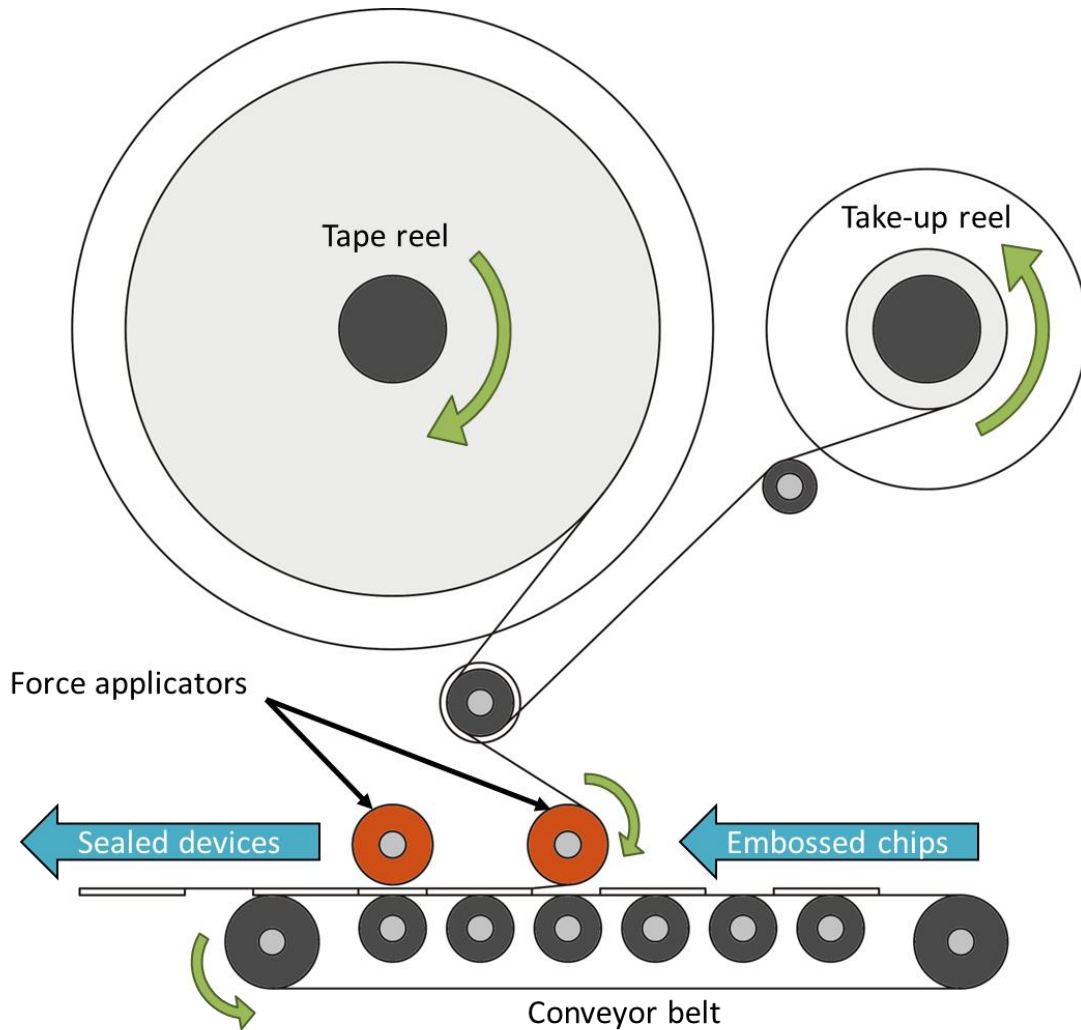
Concept for a taping machine. The chips from the embossing machine enter from the right. Compliant rubber rollers apply tape on the chips with a set amount of force as the chips pass underneath them on a conveyor belt. Sealed devices exit the machine on the left.
